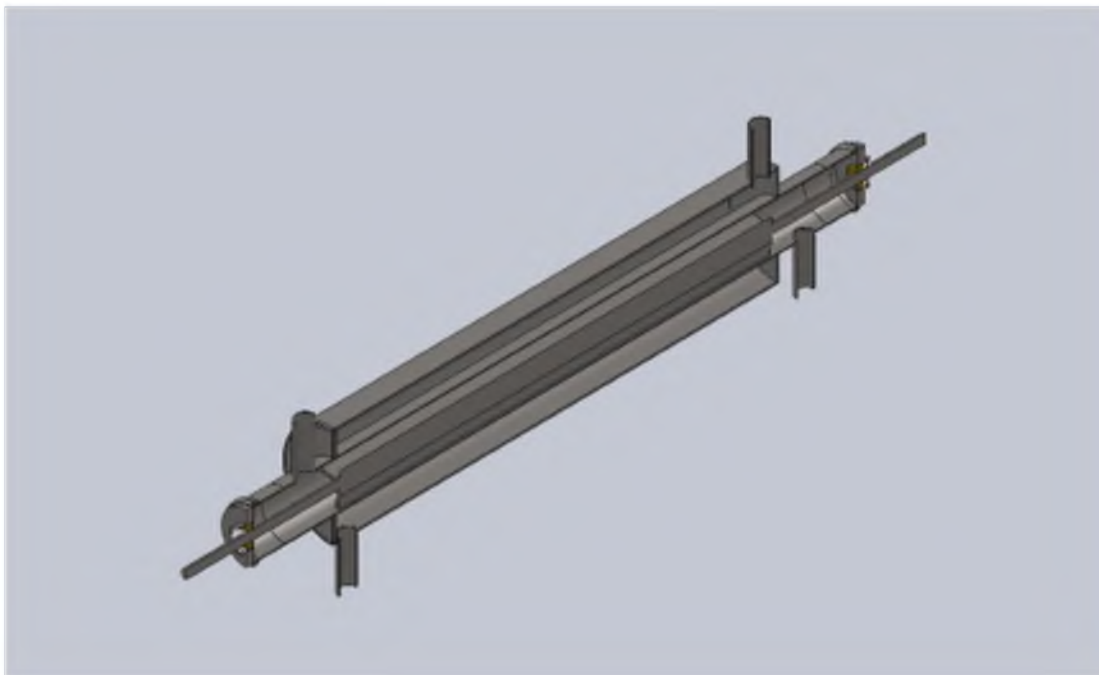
Cut-view model of SCEv3. Both ends feature rotating shaft bearing held in place with sanitary clamps. Screw design has been replaced with four-blade vane.
